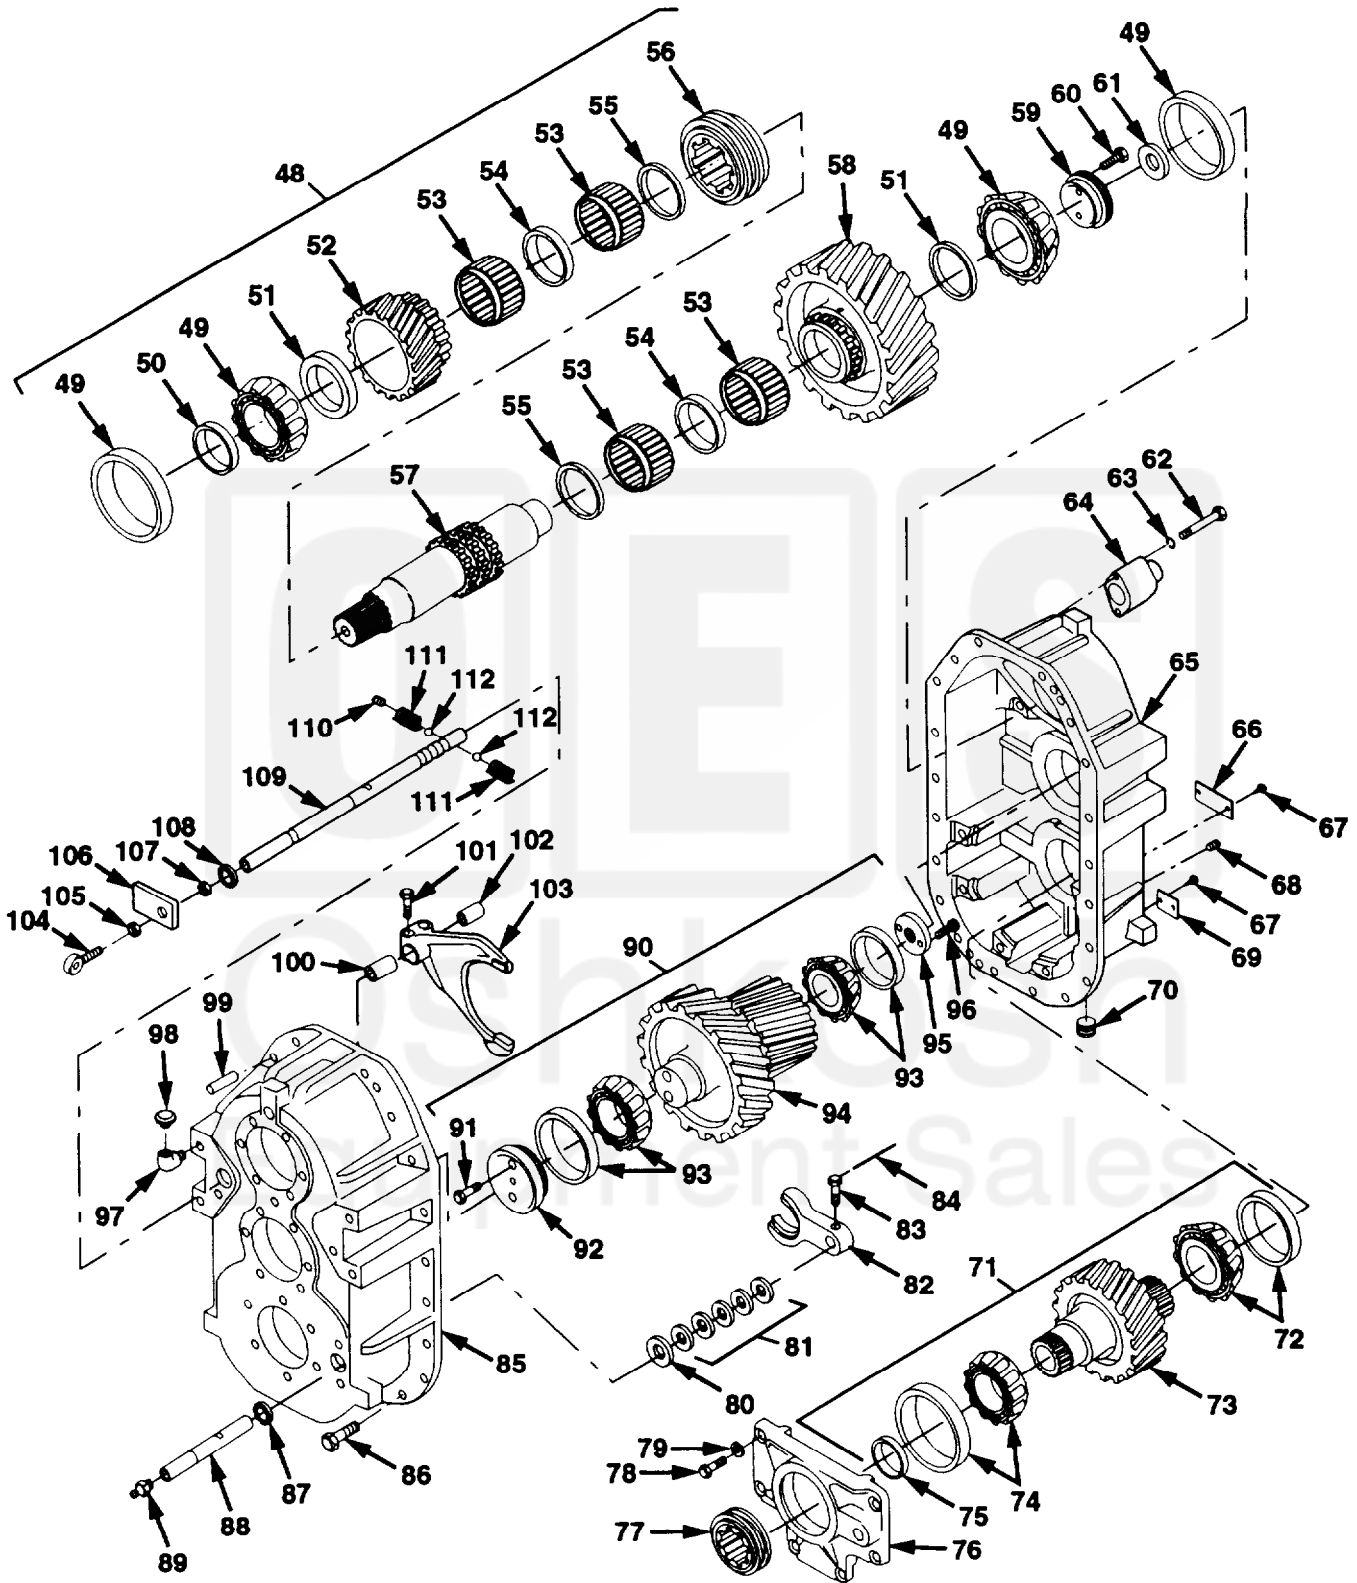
Transfer Case Assembly (Sheet 3 of 3)
